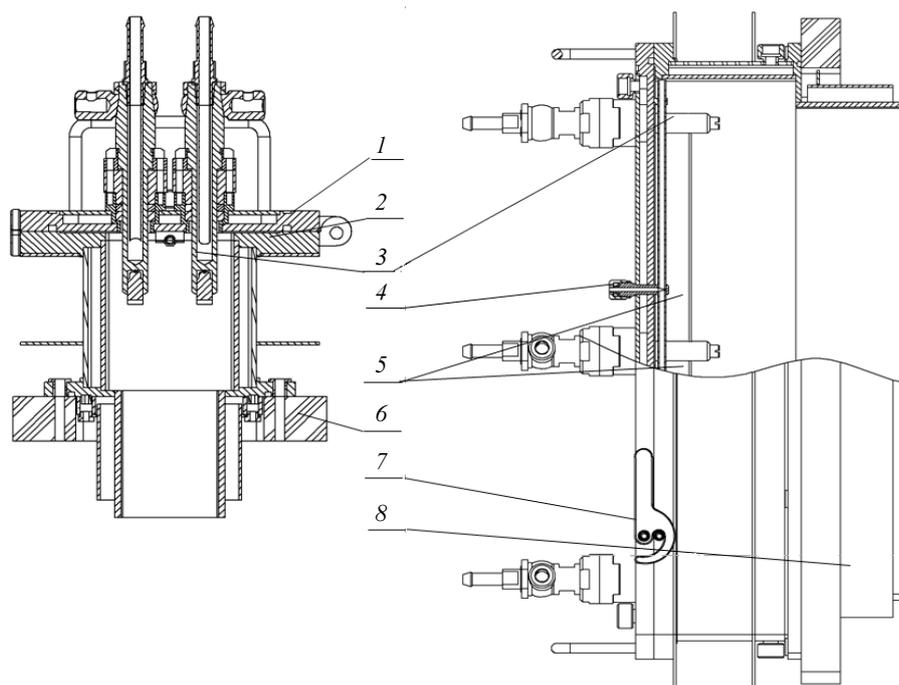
Drawing scheme of plasmagenerator "PINK-P": 1 – cover of the hollow cayhode; 2 – casing; 3 – electro input; 4 – gas input; 5 – filament cathodes; 6 – bushing; 7 – clamp; 8 – screen
